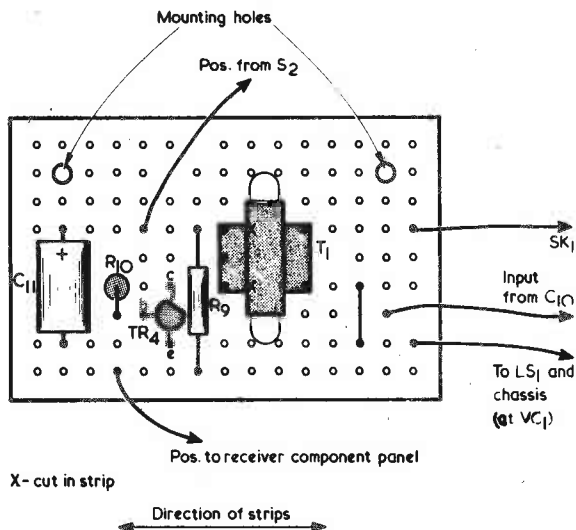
The component side of the Veroboard panel on which the output stage is wired
